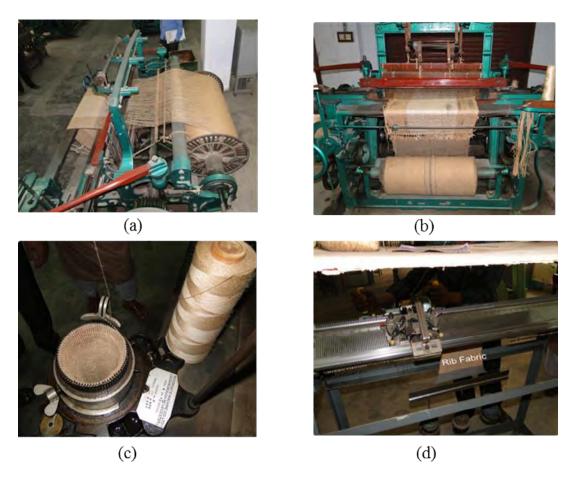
Picture of a (a) loom used for plain fabrics, (b) loom used for twill fabrics,(c) socks circular knitting machine for single jersey fabrics, (d) hand operated flat/ v bed knitting machine for rib fabrics.
